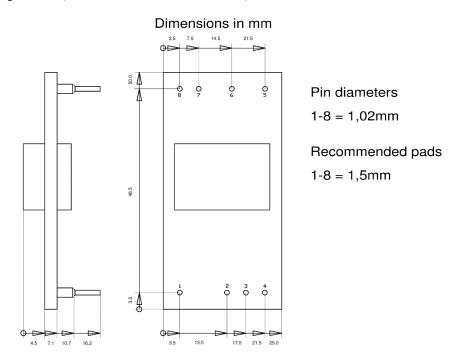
ICEbrick dimensions drawing and recommended pads for AUX-plant
